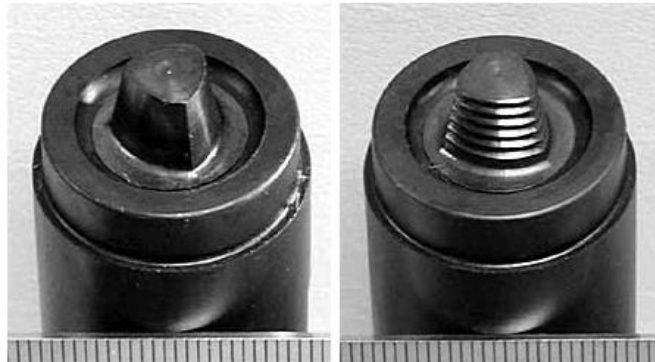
Trivex™ Tool (left) and MX-Trivex™ Tool [37]
